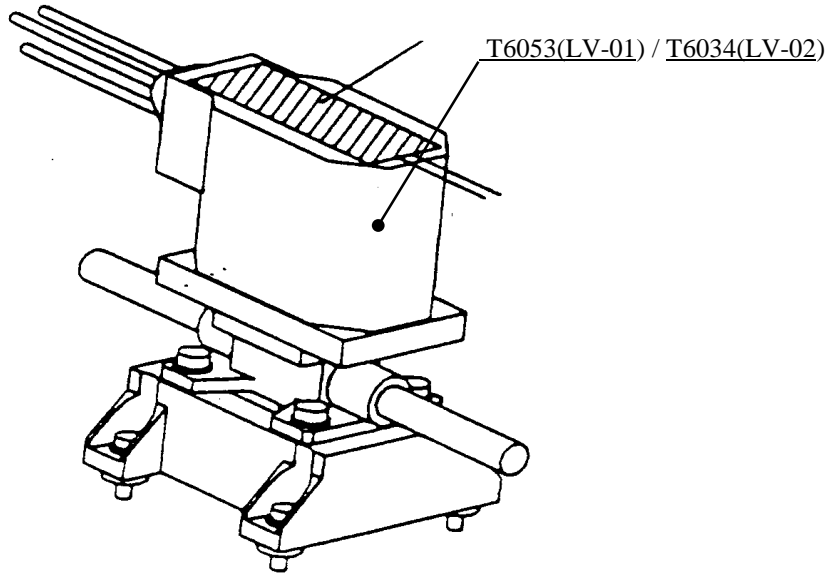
(d): THERMISTORS INSTALLATION ON LV-01 AND LV-02.
